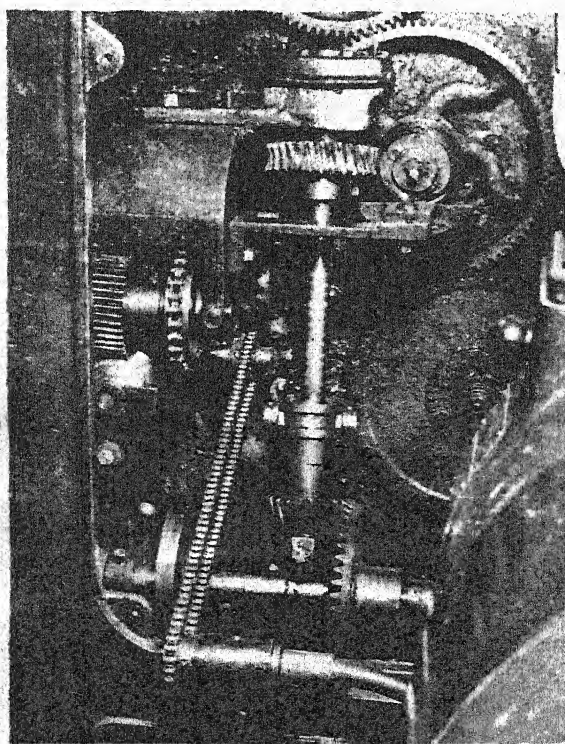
Worm and bevel drive to main cam chain drive to base cam on regulator and worm drive to chain for progressive lift.
